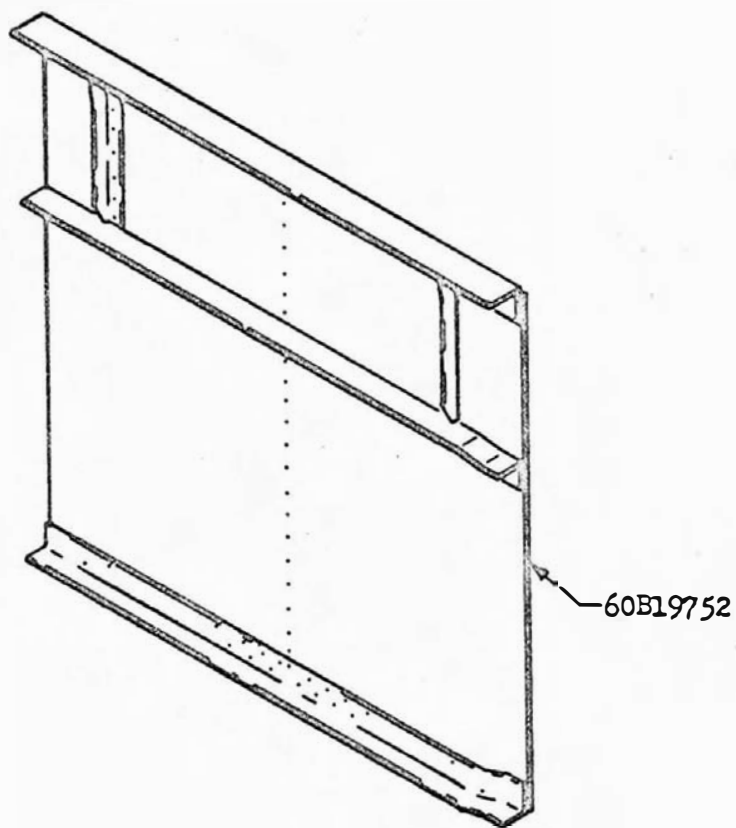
Inner Bulkhead Assembly 60B19752 and Outer Bulkhead Assembly 60B19753
